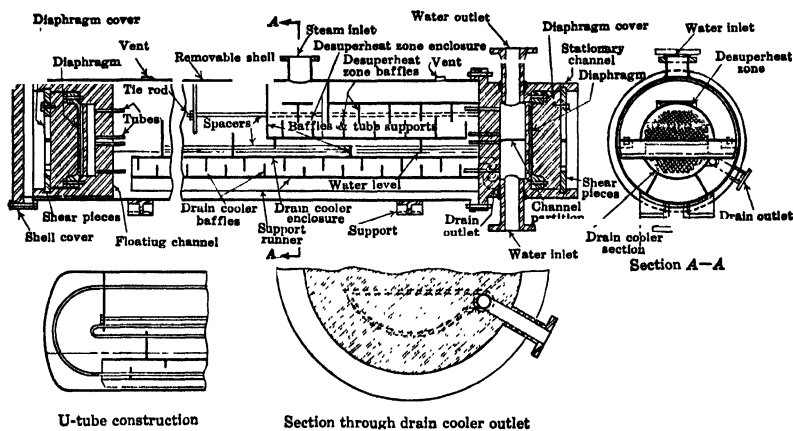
Cross section of a closed heater incorporating desuperheater and drain cooler sections. (Courtesy of Foster Wheeler Corp.)
